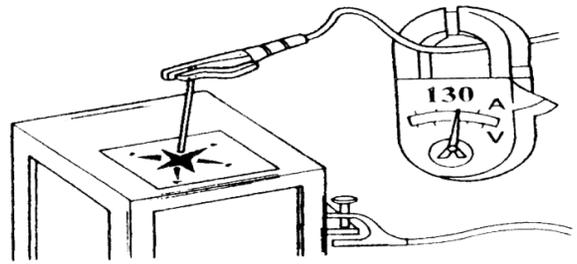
The welding current measured with Kyoritsu 2127R Ammeter
